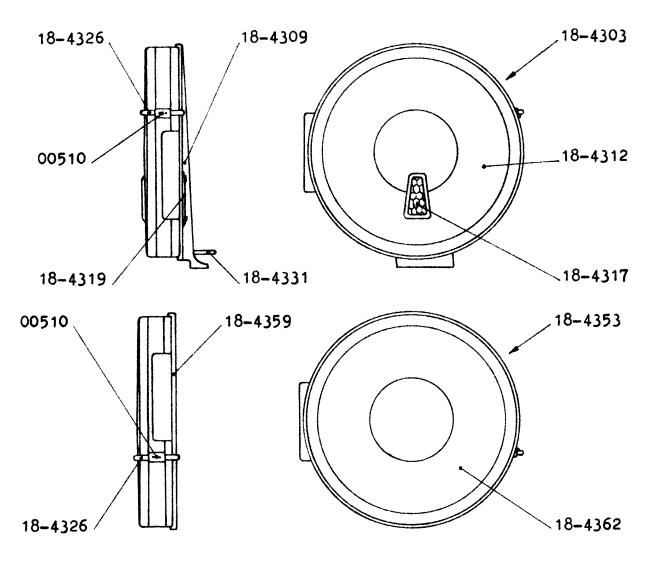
35mm UPPER AND LOWER SPOOL DISCS AND COVERS
